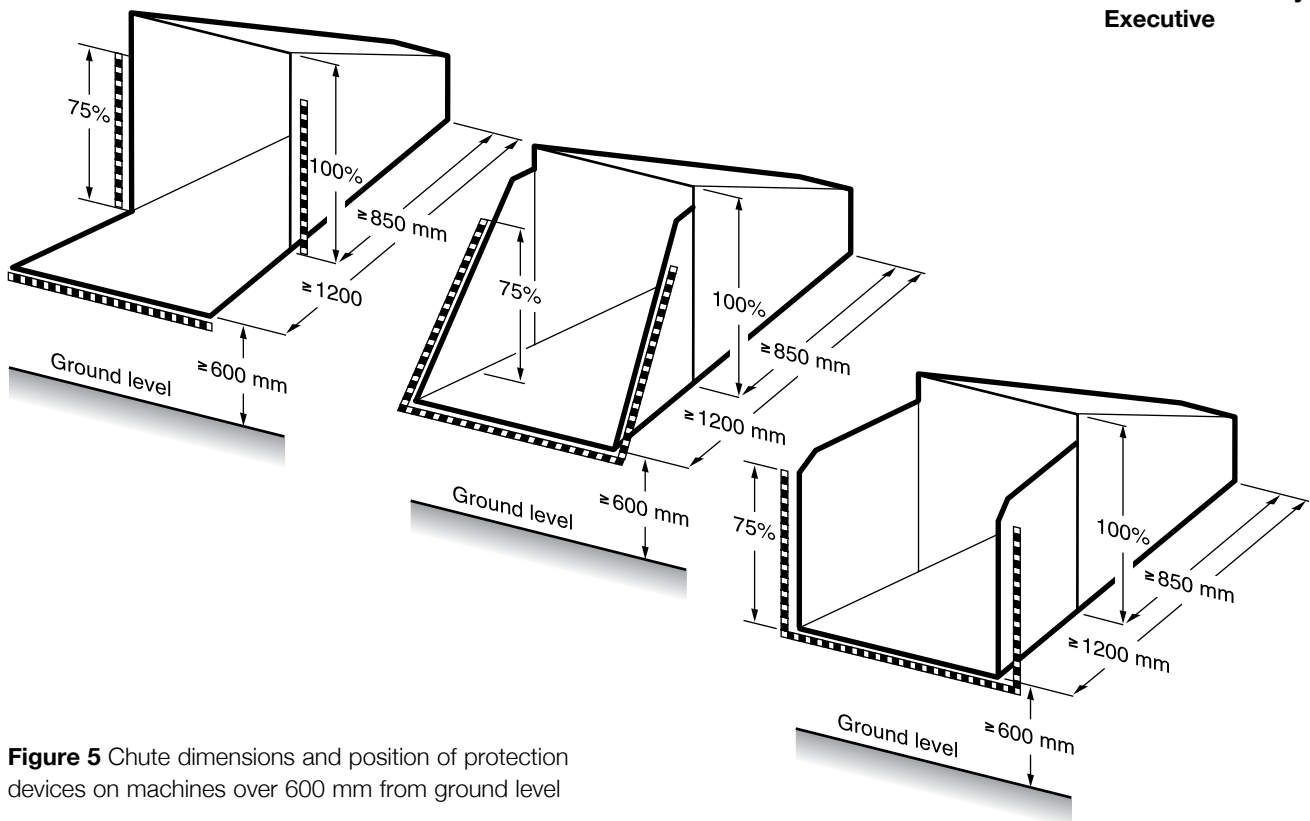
Chute dimensions and position of protection devices on machines over 600 mm from ground level
